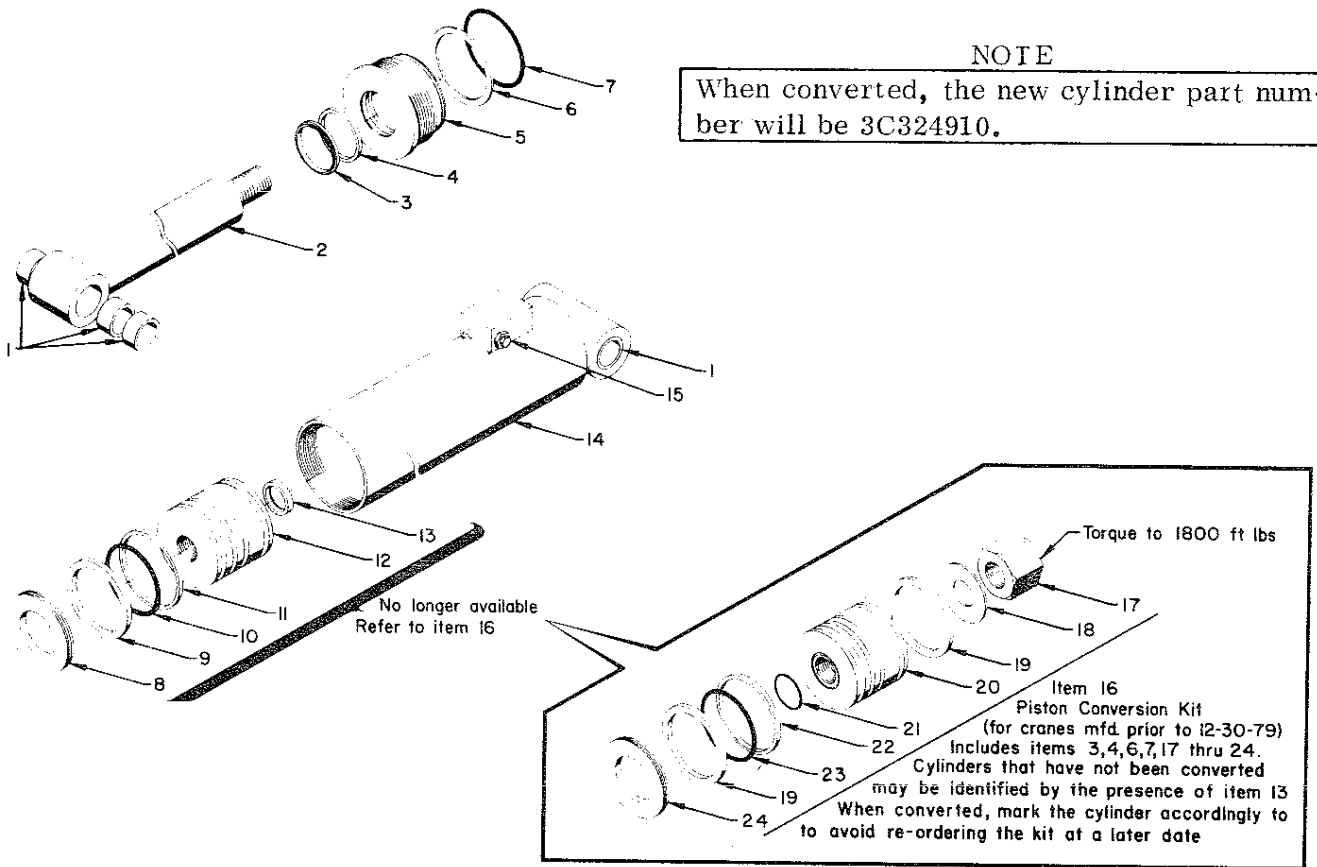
Old-Style Outrigger Cylinder (Part Number 3C263513) with Conversion Kit (Part Number 9X324910)
